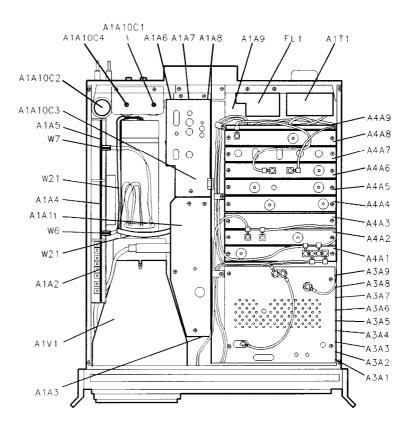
IF Section, Top View (SN 3001A and Below)
